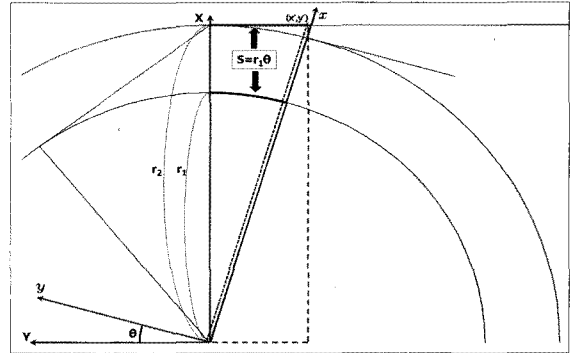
Cycloid tooth profile design of pin-pinion gear
